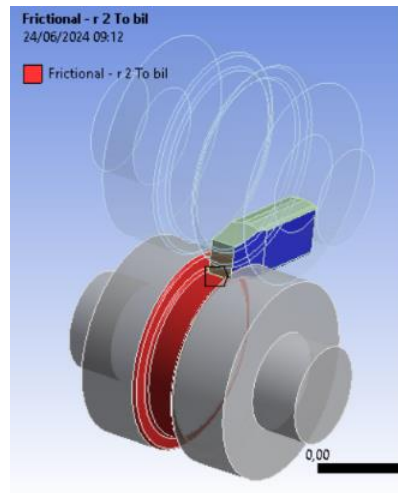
Frictional contact definition between the roller surface (target) and billet (contact).
